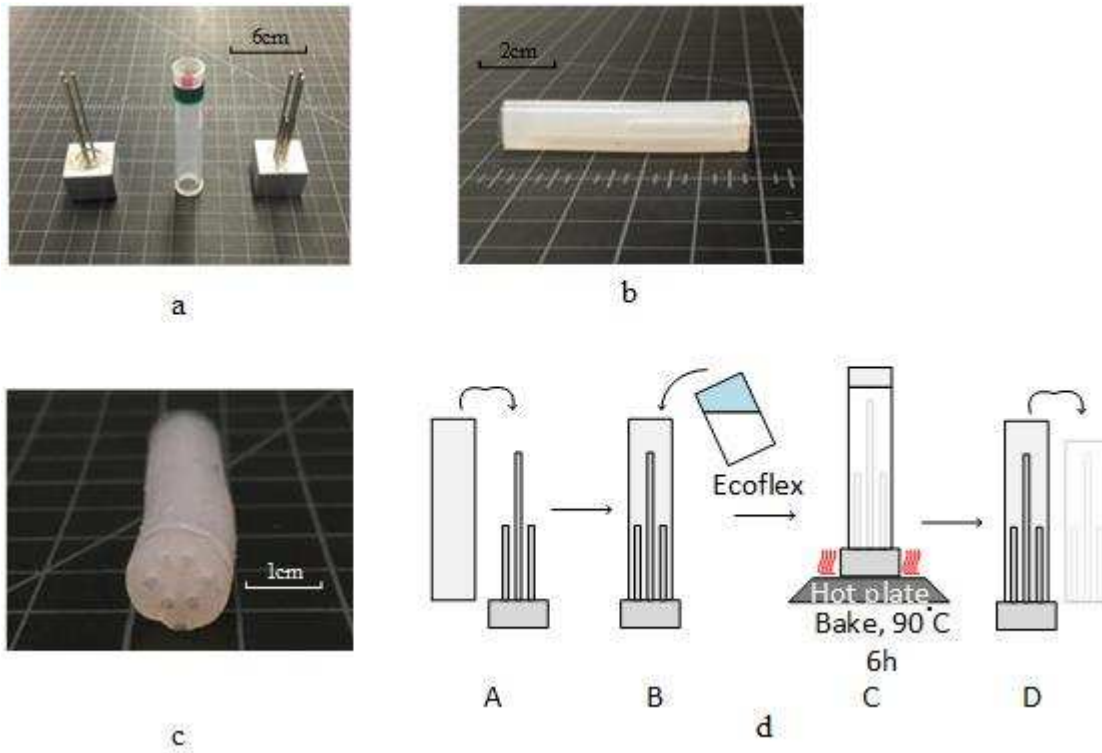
(a) The mold of making the three-chamber robotic actuator and six-chamber robotic actuator; (b) side view of the six-chamber robotic actuator; (c) bottom view of the six-chamber robotic actuator; (d) basic process of fabrication of the six-chamber robotic actuator
